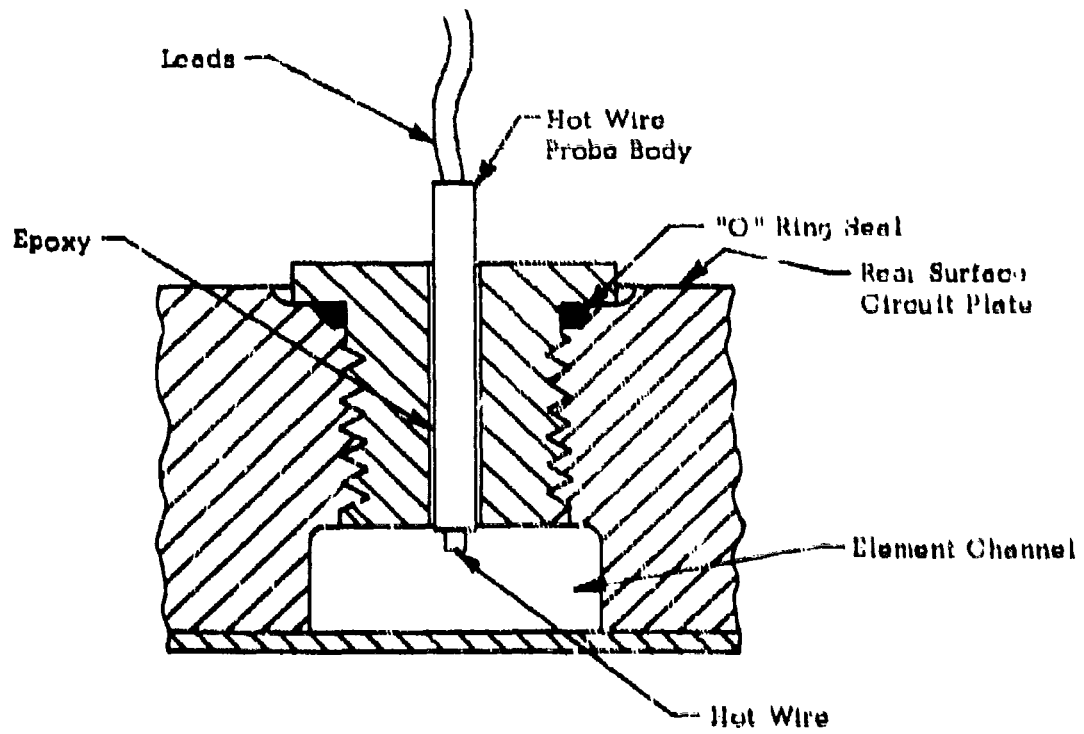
HOT WIRE PROBE MOUNTED IN PLUG ASSEMBLY
